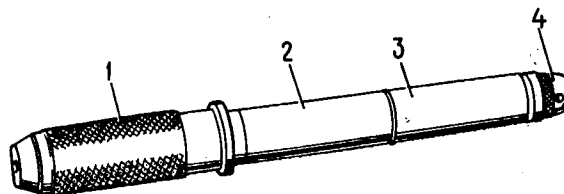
Tool 02.7853.9500 for Press-Fitting Piston Pin into Piston and Connecting Rod End: 1 - tool shaft; 2 - piston pin; 3 - guide; 4 - thrust screw
